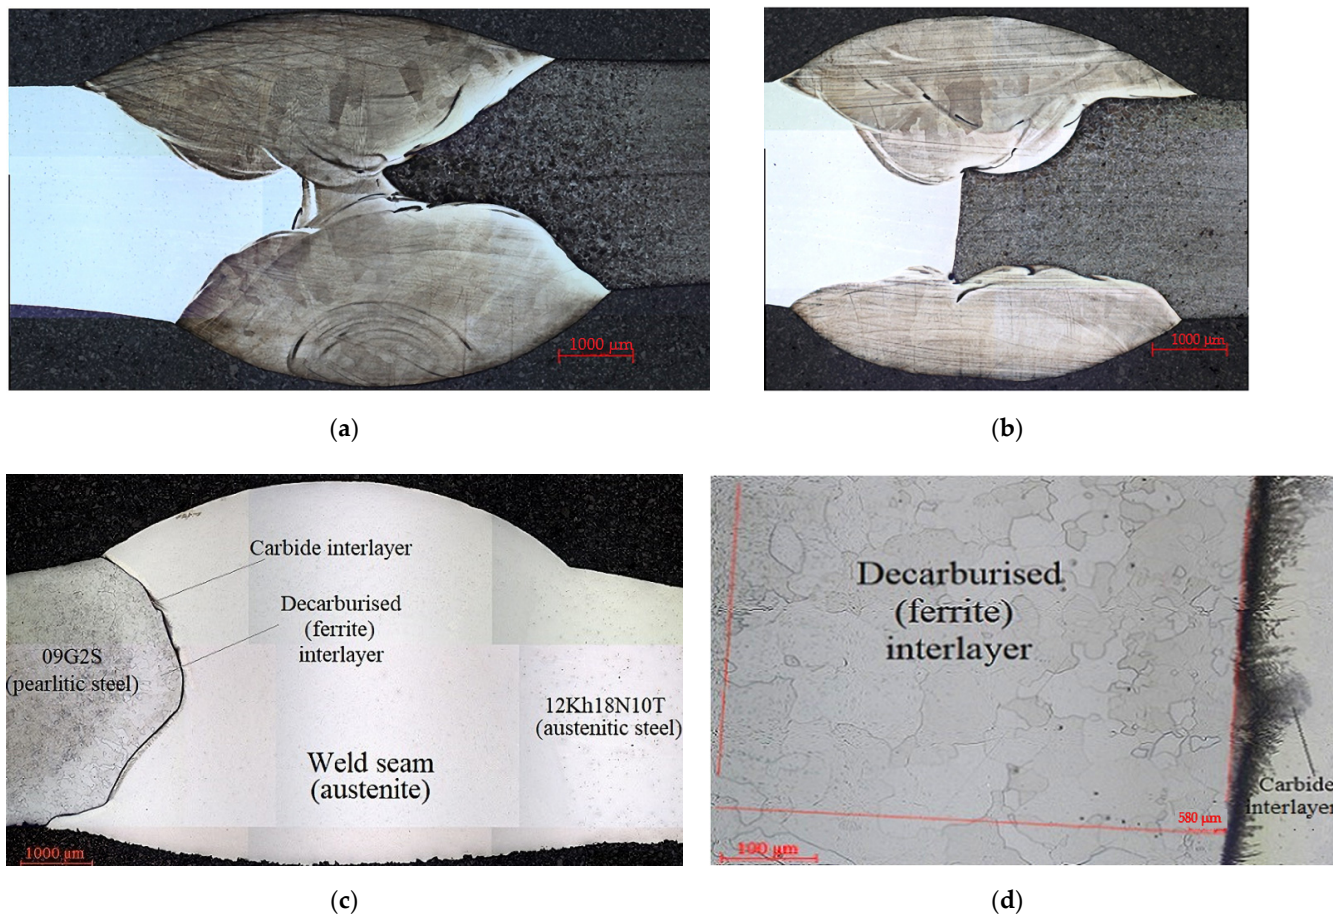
Transverse metallographic sections of dissimilar welded joints of steel 09G2S and 12Kh18N10T: plates pair No.1, without defects (a); plates pair No.2, with lack of penetration (b); plates pair No.3, after heat treatment, with diffusion interlayers (c,d).
